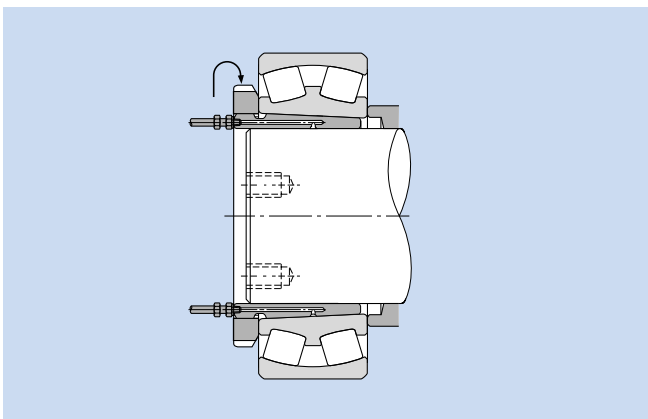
Extraction using hydraulic withdrawal sleeve
